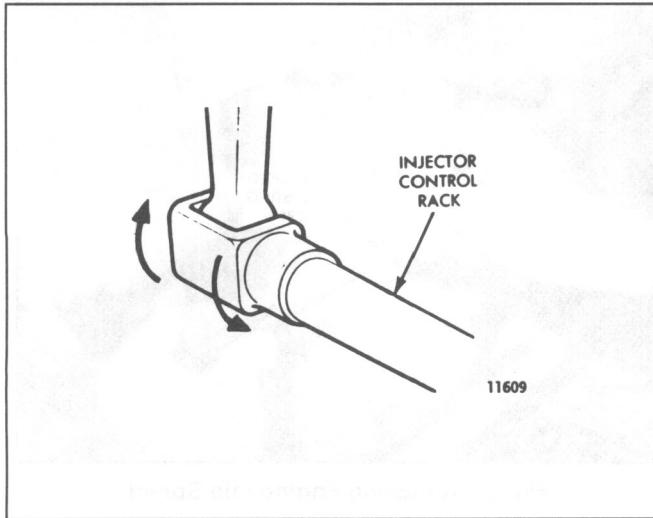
Checking Rotating Movement of Injector Control Rack
